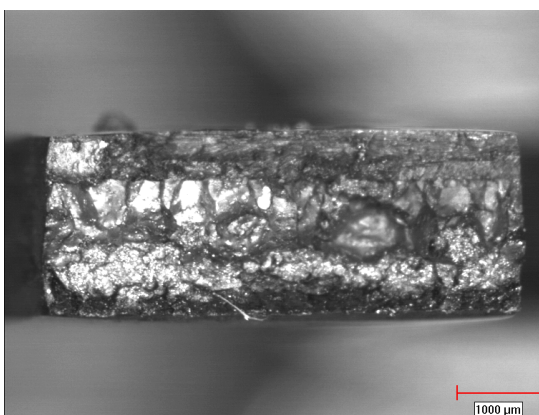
Fracture surfaces of 0.25% strain René 80 TMF specimen
